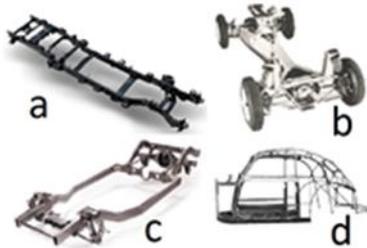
(a) Ladder chassis, (b) Backbone chassis, (c) Perimeter Chassis, (d) Superleggera
